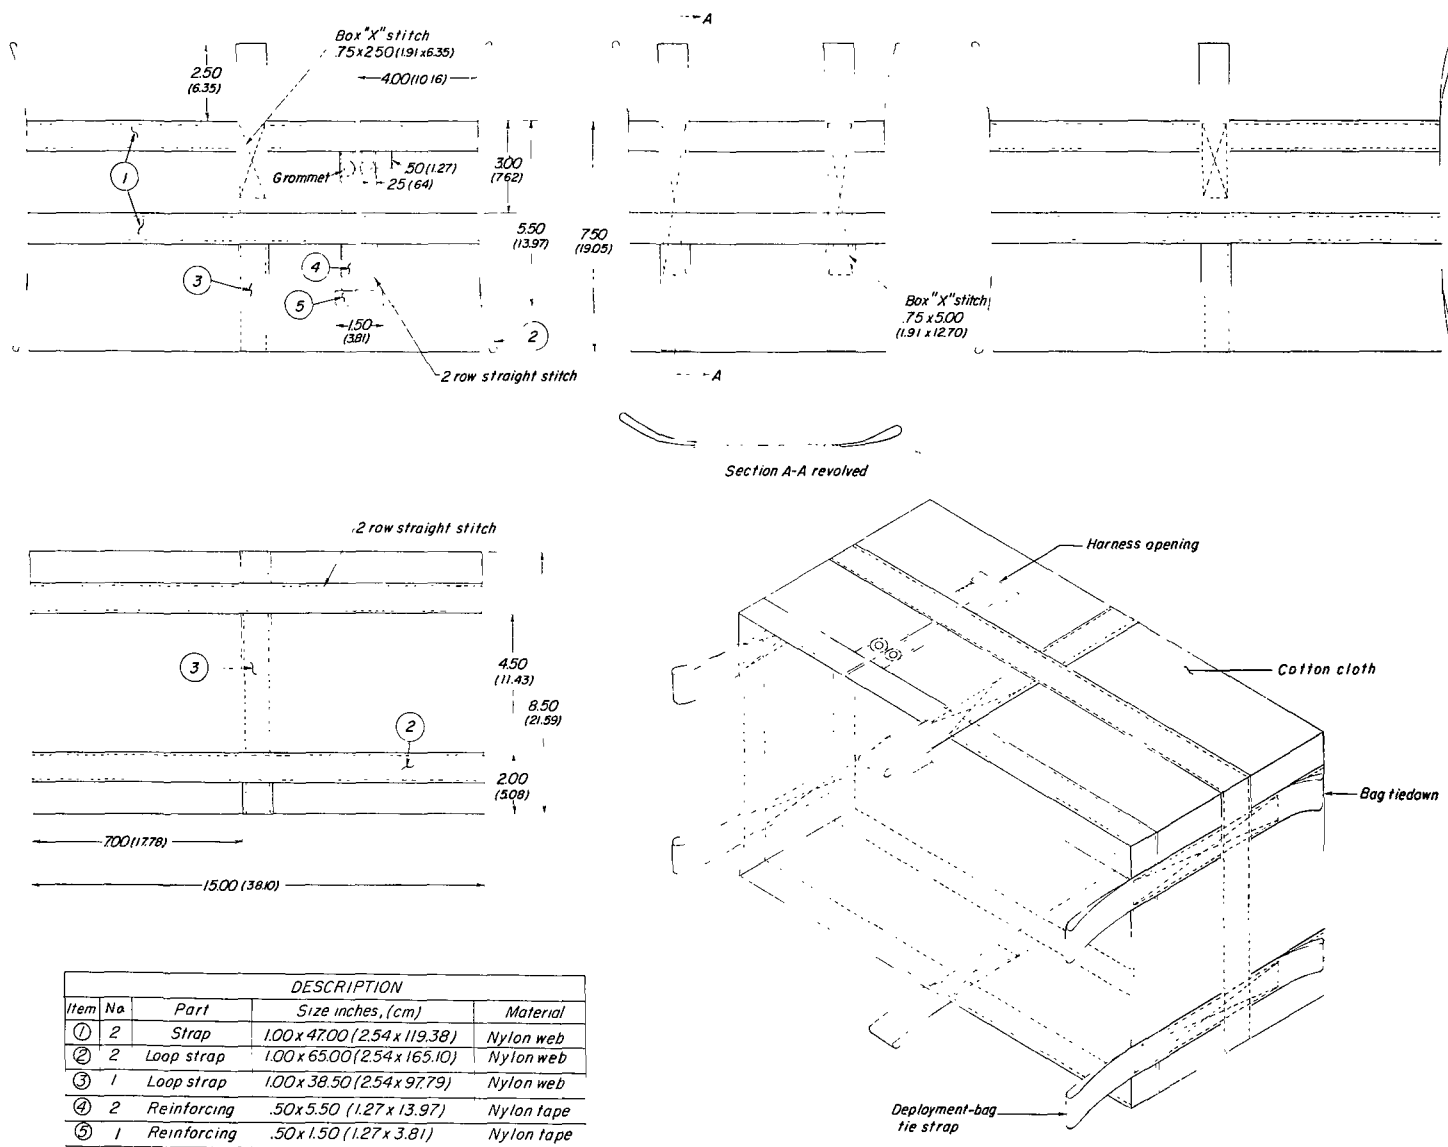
Deployment-bag container. Dimensions are in inches (centimeters).
